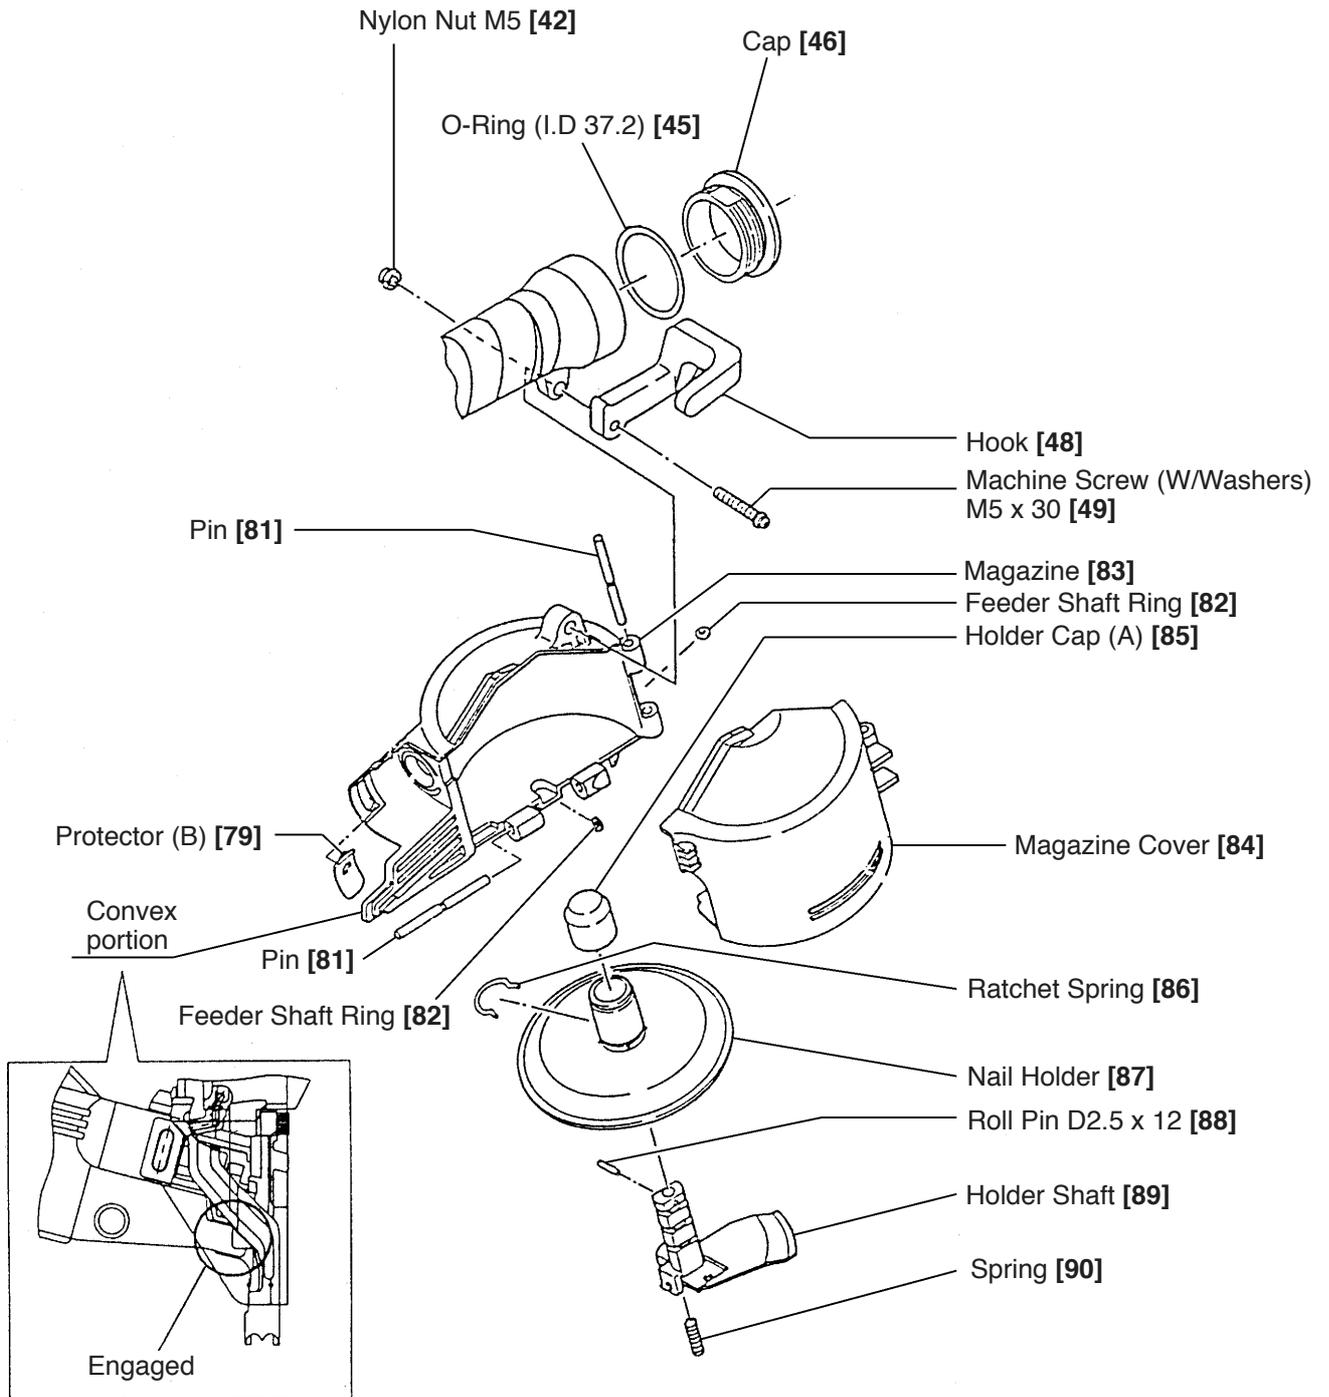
Disassembly and reassembly of the cap and the magazine section
